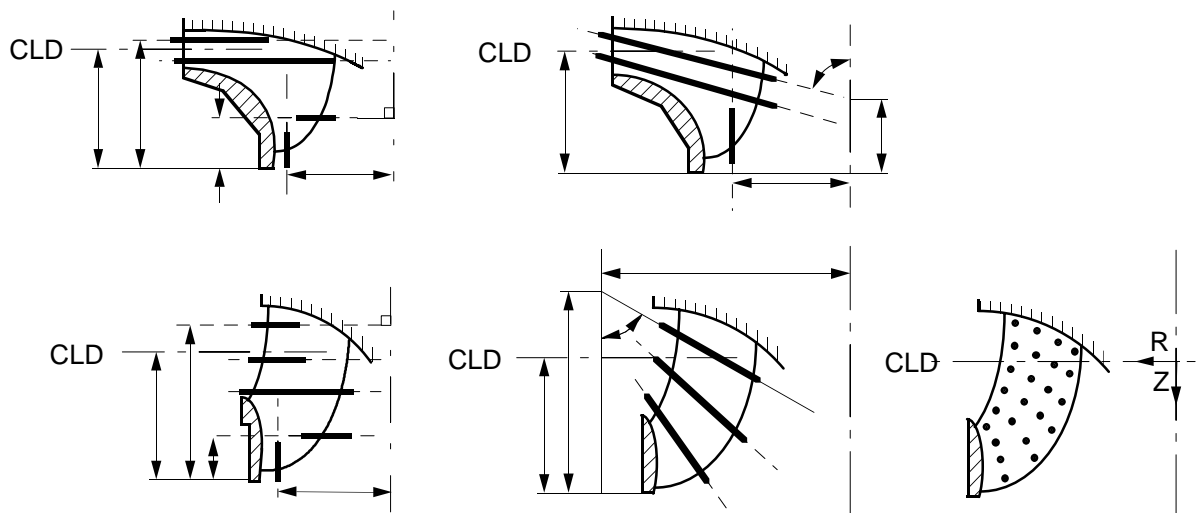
Example of the dimensions to be checked on the runner/impeller of a radial flow machine
